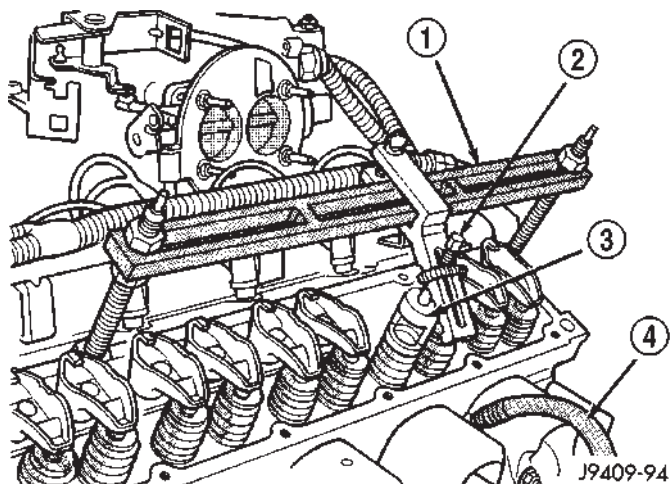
Valve Spring Compressor MD-998772A with Adaptor 6716-A and Screw 6765
